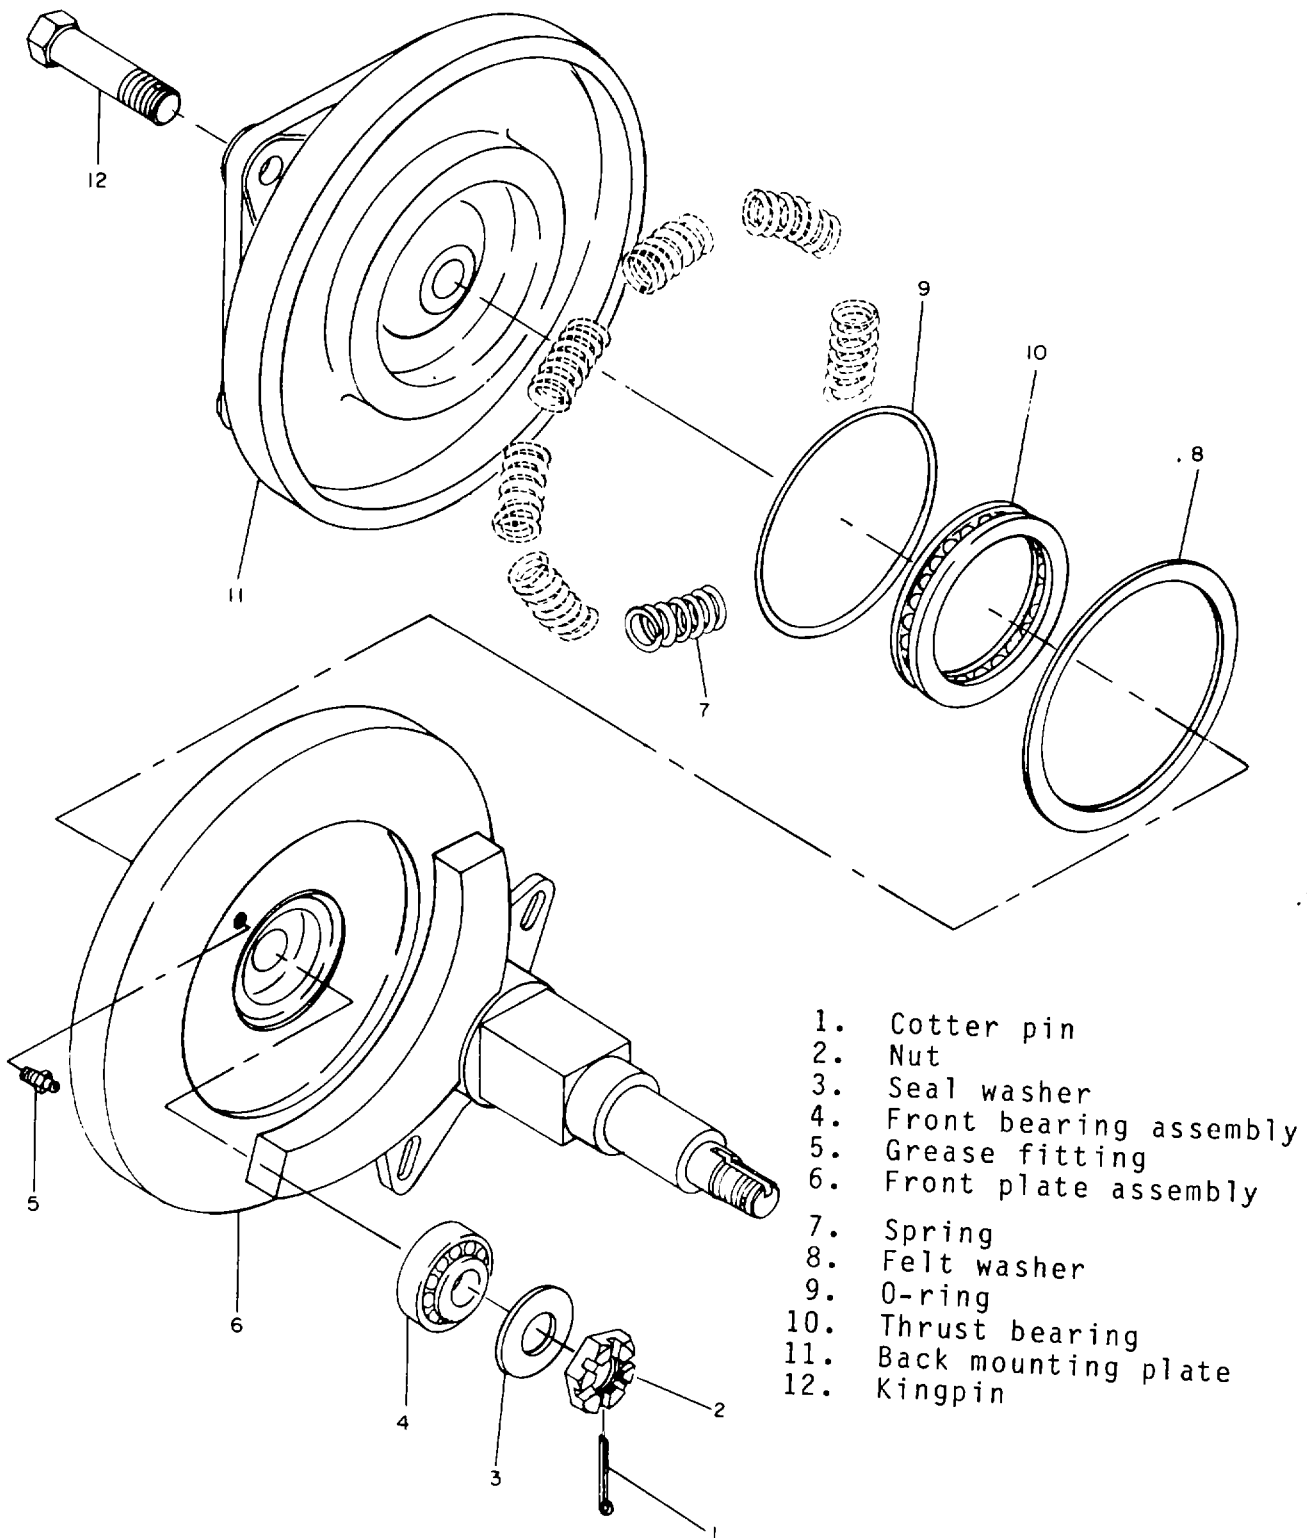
Banjo suspension spring assembly (used on rear transporter assembly)
